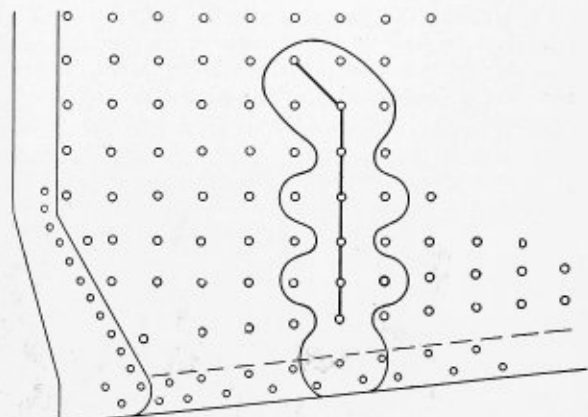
Cutting Out Flue Sheet with Oxygen-Acetylene Torch
